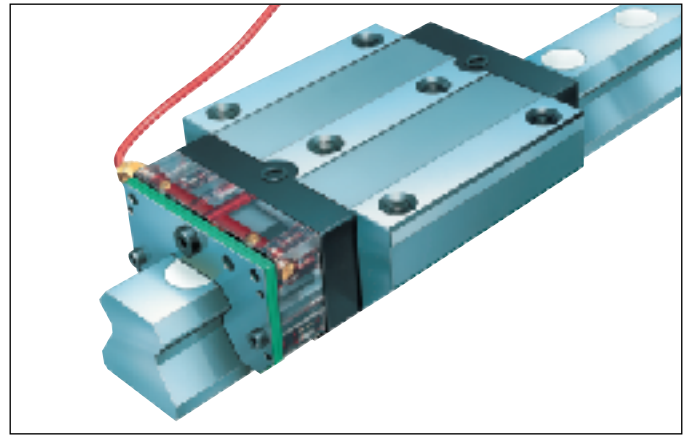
INA linear recirculating roller bearing and guideway assembly RUE..D with SMDE
